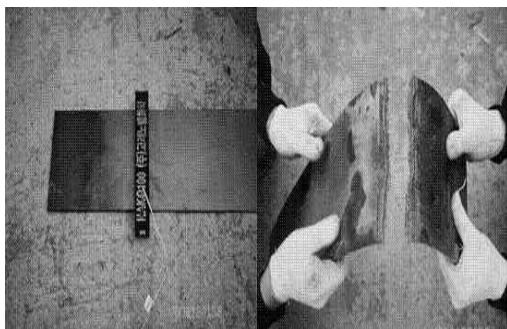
Cut 6mm steel plate(explosive : 160g/m)
